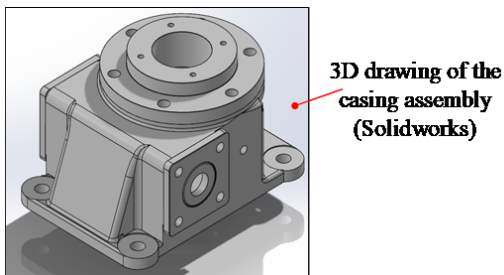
Assembly drawing of the casing, where the components are assembled in SolidWorks
